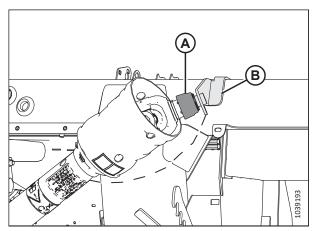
Driveline in Storage Position – Sidehill/ Hillside Driveline MACB7180, MACB7181, or MACB7326
